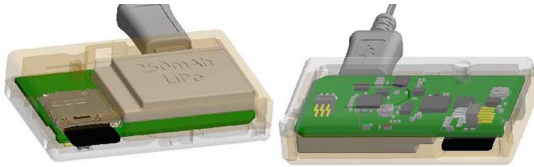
Mechanics design for the device. Footprint is limited by the battery and the memory card slot, both placed on the bottom side. Height is limited by the battery (5.2mm), thickness of 4-layer PCB (1mm) and the button (1.7mm) on a top side of the PCB. The button (tactile switch) is in direct contact to the top cover of the mechanics. The plastic mechanics was 3D-printed in-house.
